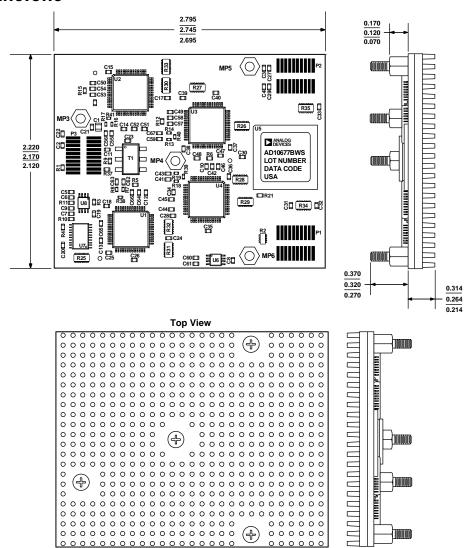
AD10677 Outline Dimensions Dimensions shown in inches
